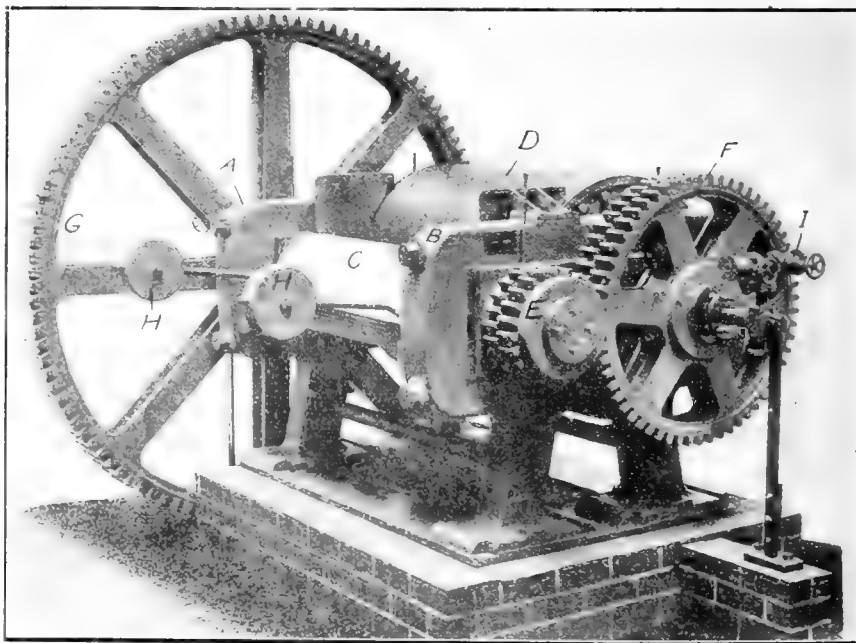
HAUBOLDT'S ITPLATE MILL.
